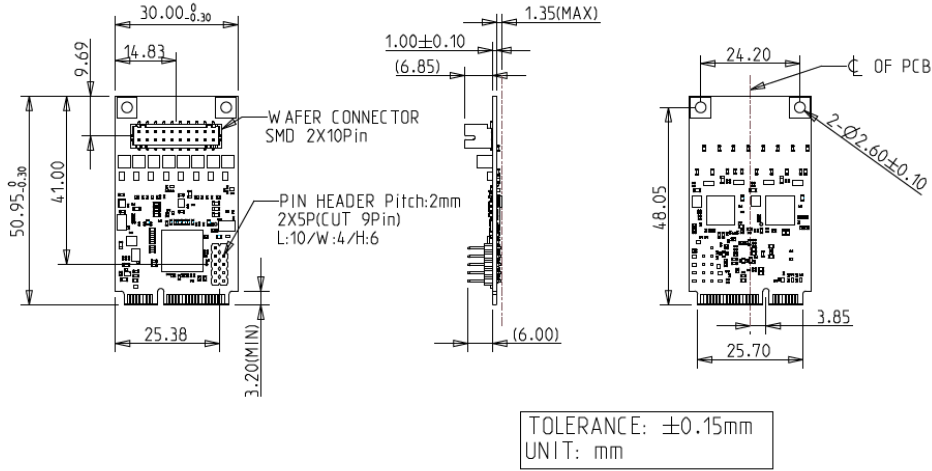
EMPL-G2N1 mPCIe Board Drawing
